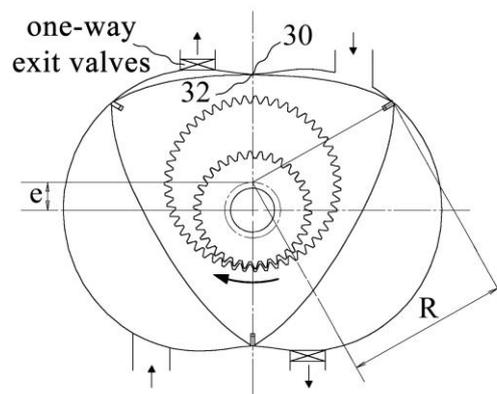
A cross sectional view through the machine with rotor at ‘engine’ TDC (top dead centre) position.
